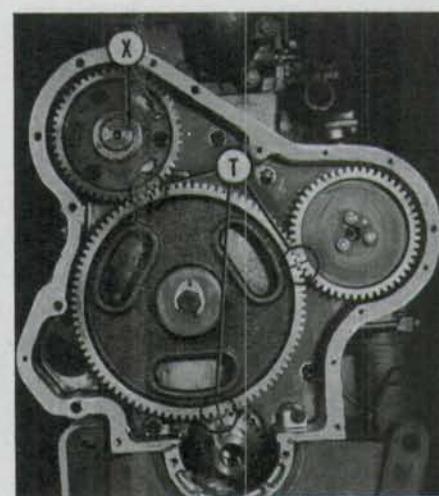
Timing gear train showing timing marks (T) properly aligned. Camshaft gear is correctly installed when stamped "D" marks are in register as shown at (X).
